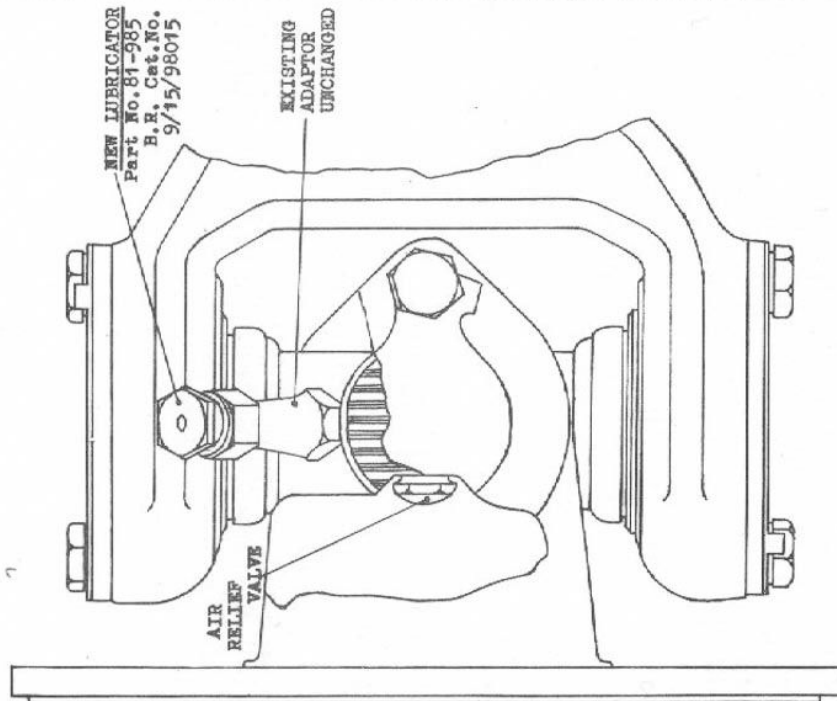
UNIVERSAL COUPLING - FREEWHEEL SHAFT (K6/0150)
